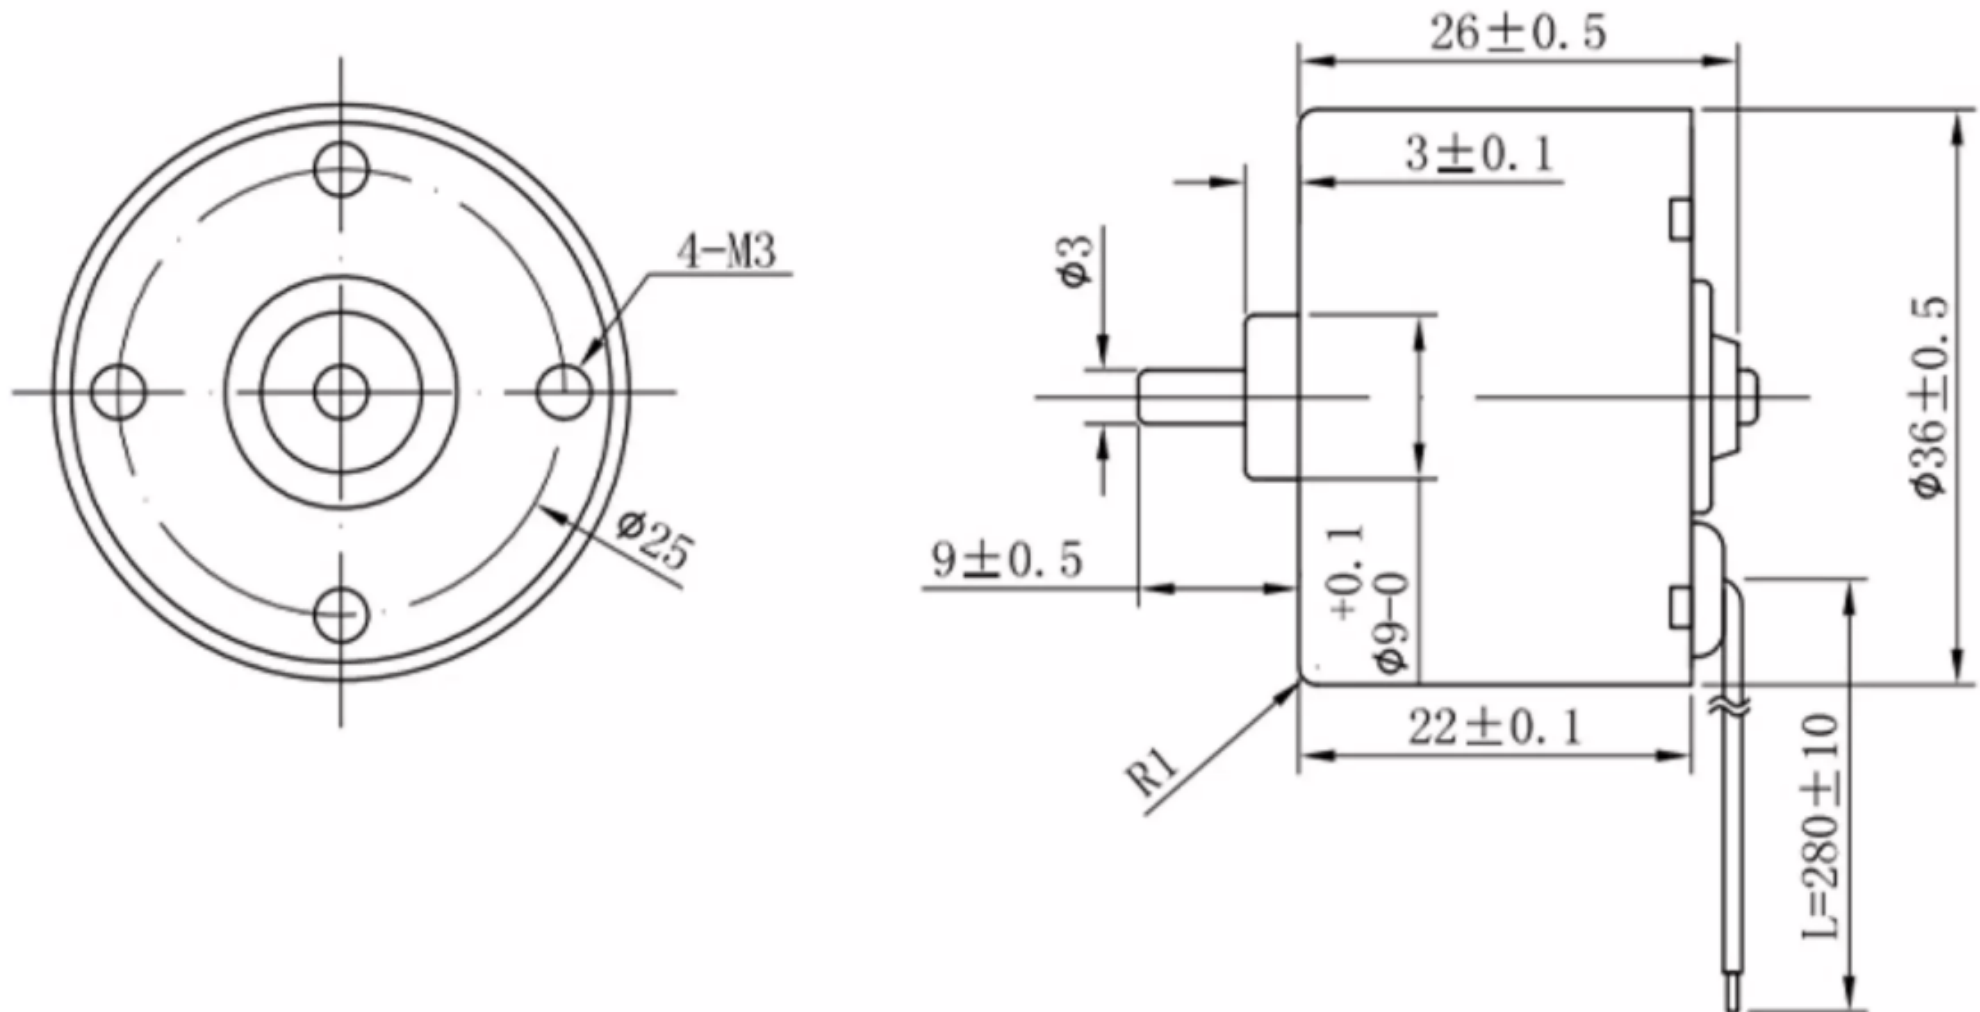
9 mm shaft length mechanical drawing. Dimensions are in mm unless otherwise specified.
